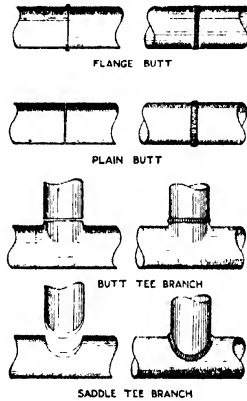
(right).—METHODS OF JOINTING FUSION-WELDED COPPER-PIPE JOINTS (*The British Oxygen Co., Ltd.*)
